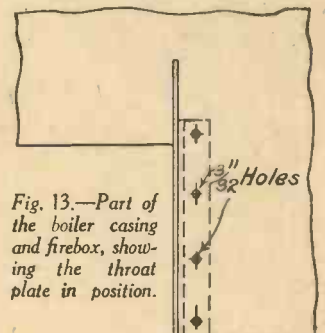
Part of the boiler casing and firebox, showing the throat plate in position.
